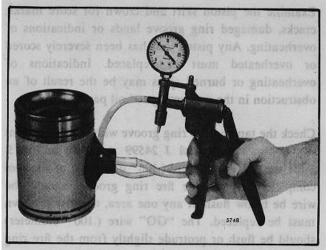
Checking Piston Pin Retainer for Proper Sealing using Tool J 23987-01
